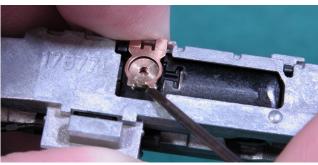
The circuit board clips can be challenging to remove. You might squeeze the board down to take some pressure off the fingers at the motor pole. Carefully lift the fingers free of the pole.
